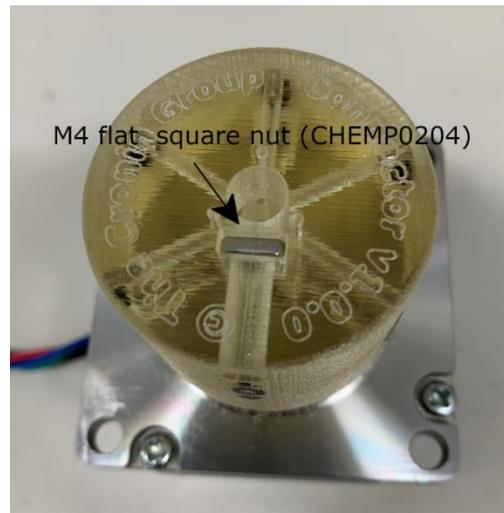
A square nut was inserted into the top rectangular slot of the shaft coupling.
